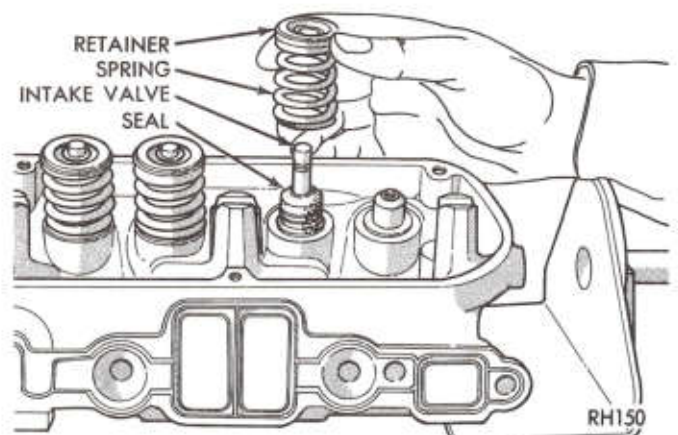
Installing Valve, Cup Seal, Spring, and Retainer
